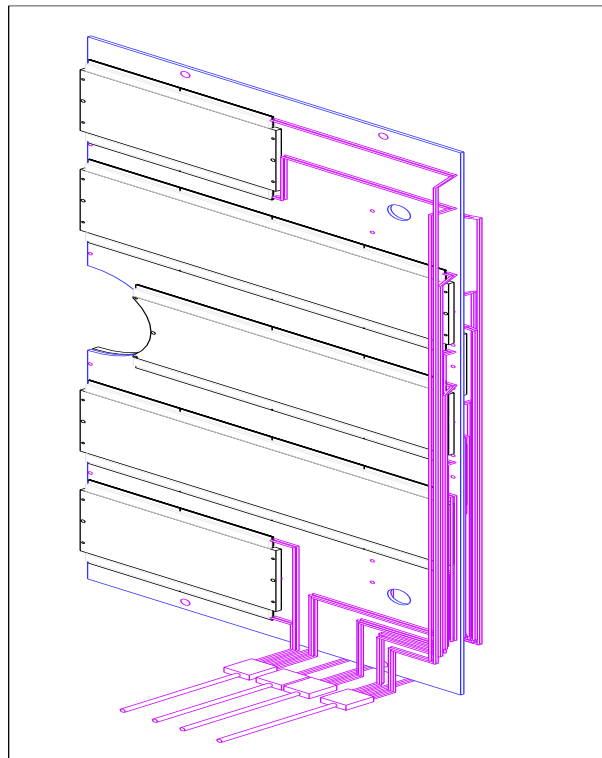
Station 3 (1/2 chamber 5 or 6) : principle of LV cables on slats : 4 cables of $5 \times 16 \text{ mm}^2$ are divided in cables of smaller sections.
